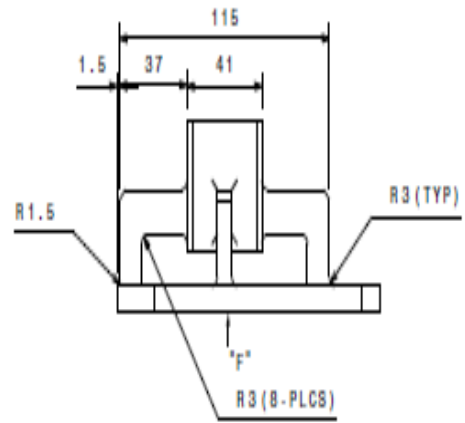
Drawing of modeled dynamometer for manufacturing
